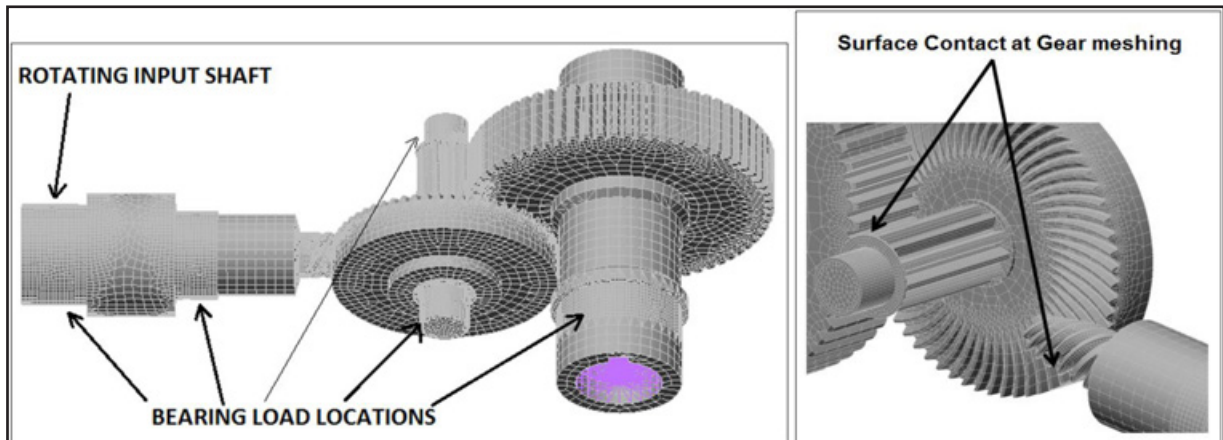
Meshing of internal parts' assembly, and gear meshing surface refinement.
